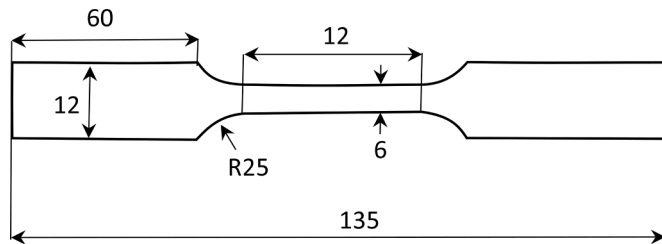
Sample geometry for cyclic aging tests. All dimensions are in mm.
